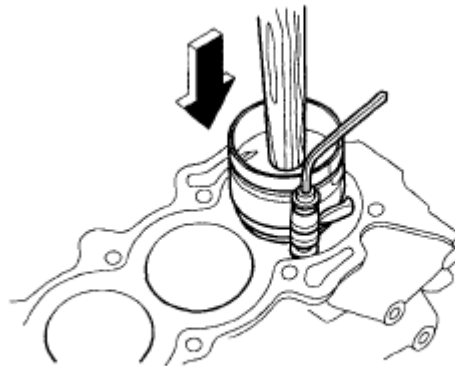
Installing Connecting Rod And Piston Assembly Into Cylinder Bore
